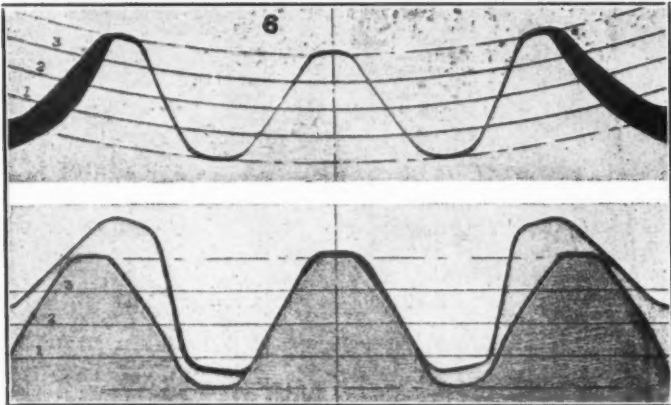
Sections of Lanchester and straight gears in mesh, the Lanchester gear being the upper of the two
